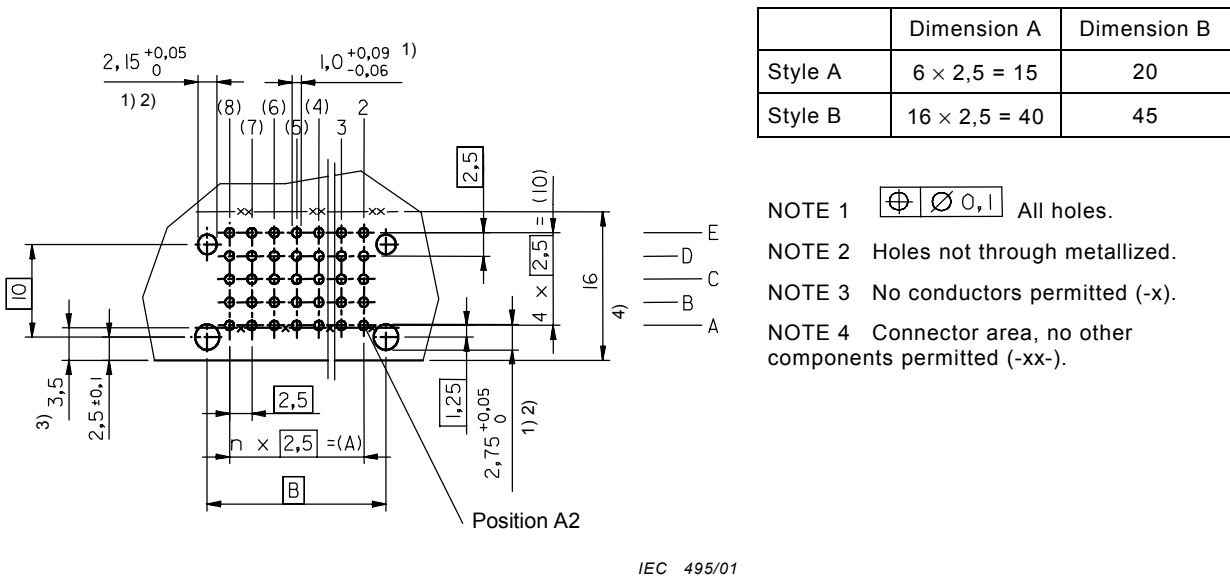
Example of hole pattern on printed board in the 25 mm equipment practice
